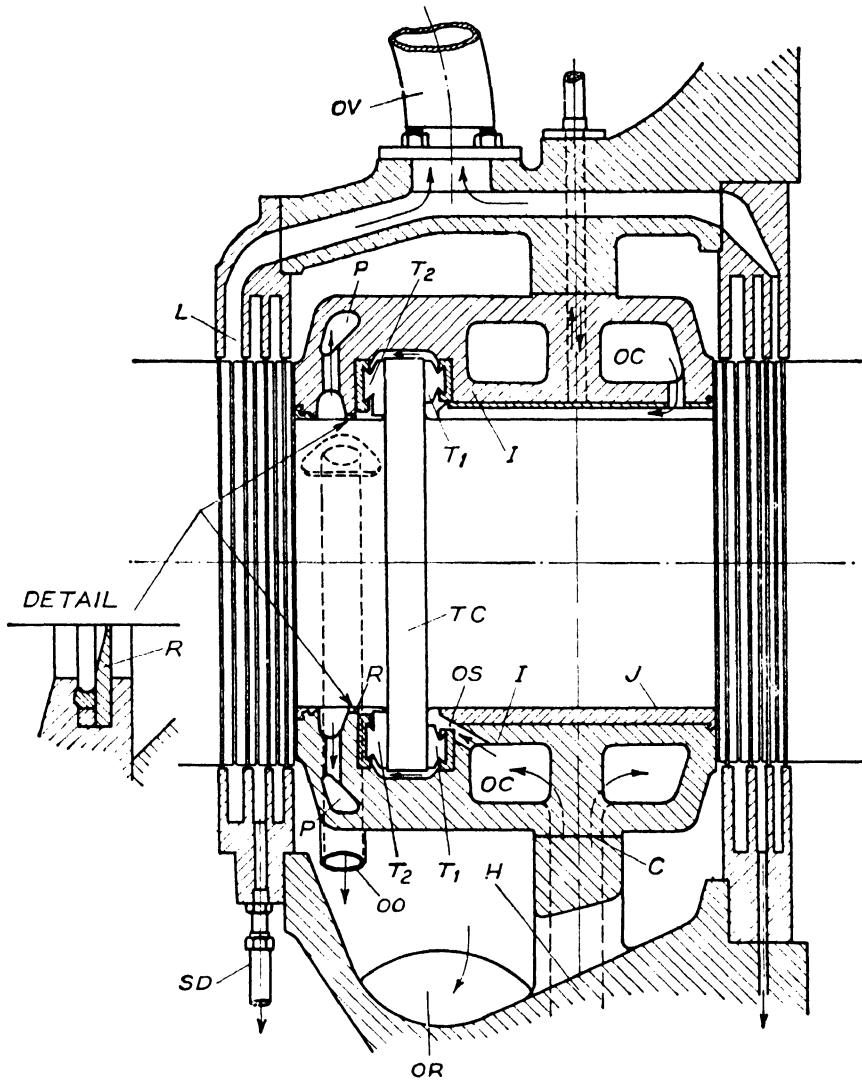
Thrust bearing for steam turbine, by Brush Electrical Engineering Co., Ltd., Loughborough
